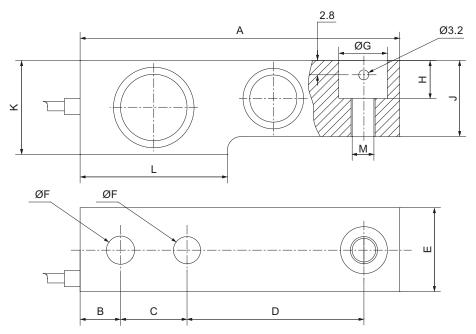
SIWAREX WL230 SB-S SA dimension drawing
